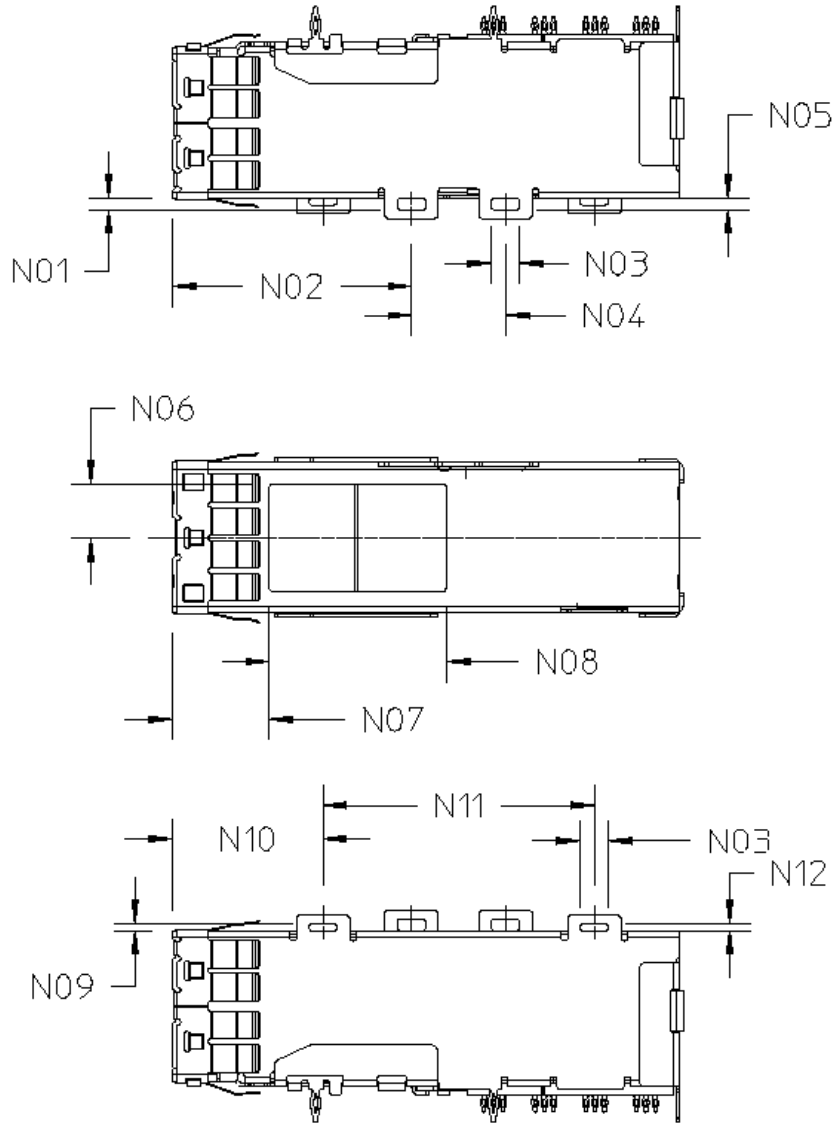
CAGE HEAT SINK ATTACHMENT
